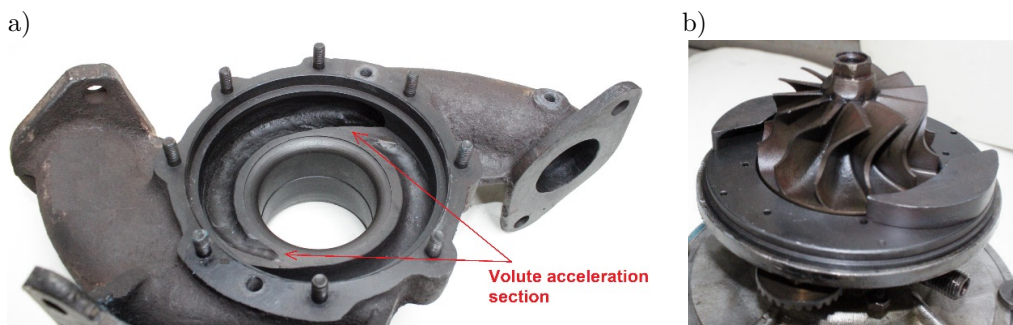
Prototype of a variable geometry turbocharger: a) turbine housing, b) profiled elements mounted on the rotating disc.
